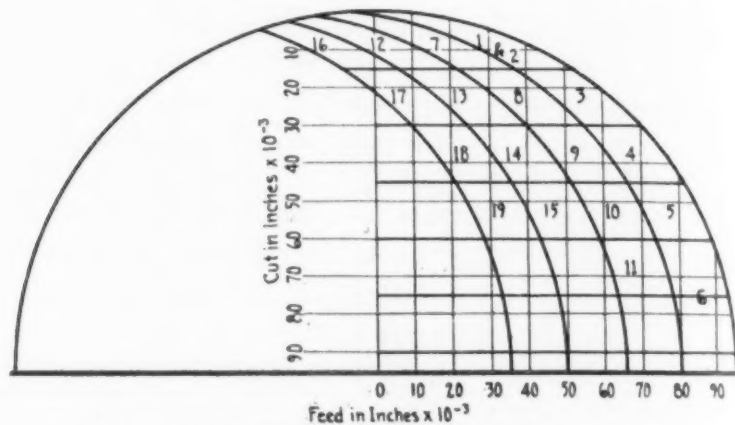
Contour of Cutting Edge and Shape of Chip.
